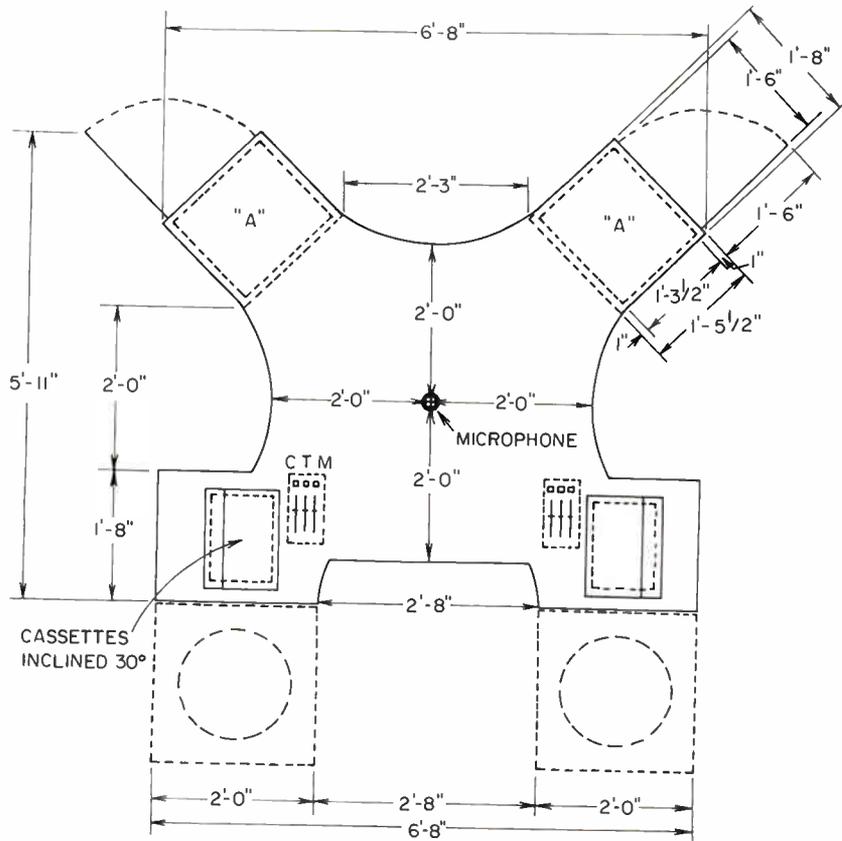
Top view of the table, showing equipment locations and dimensions. The table rests on the pedestals in which the cartridge-tape machines are located and on the equipment housings.
